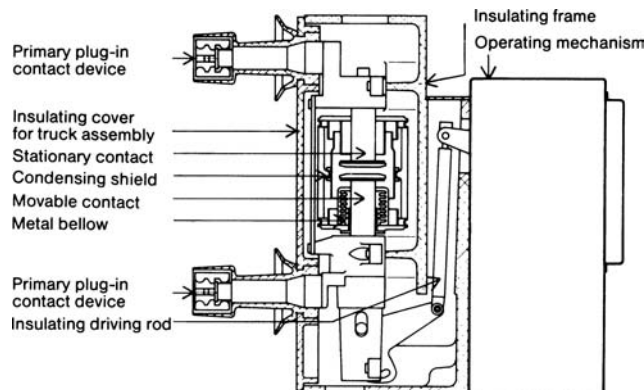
Outline and interrupter details of a 15-kV horizontal-drawout vacuum circuit breaker 2000A, 28 kA. (ABB T&D Company, Inc.)
